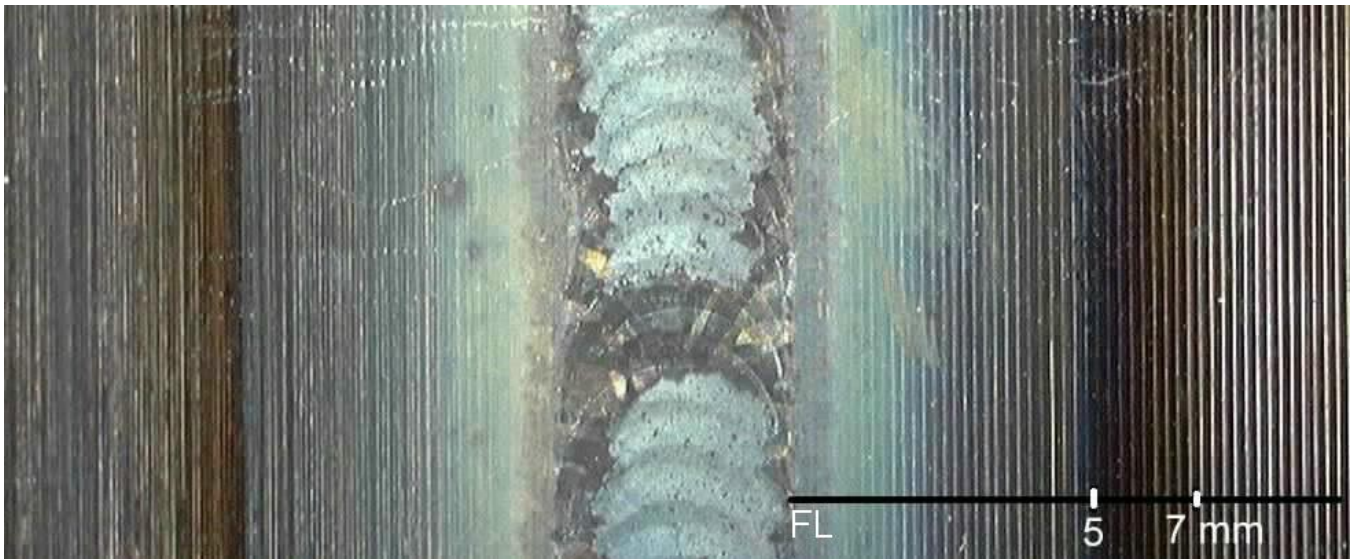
Macrograph of the single pass root weld surface showing the coloured regions of the HAZ.
